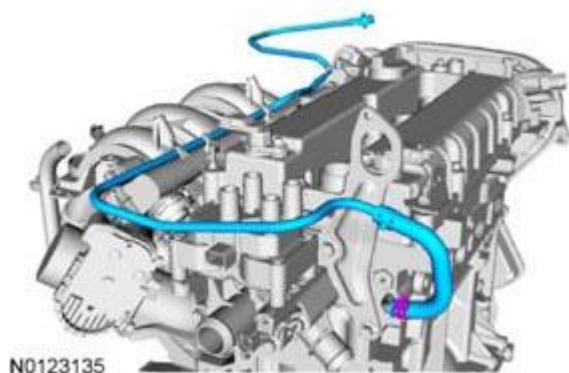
Identifying Coolant Tube And Fuel Rail Retainers
